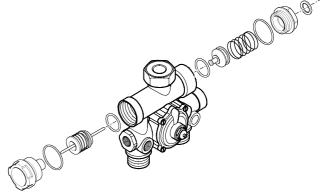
10) Reassemble the diverter group carrying out the removal operations in reverse order.
